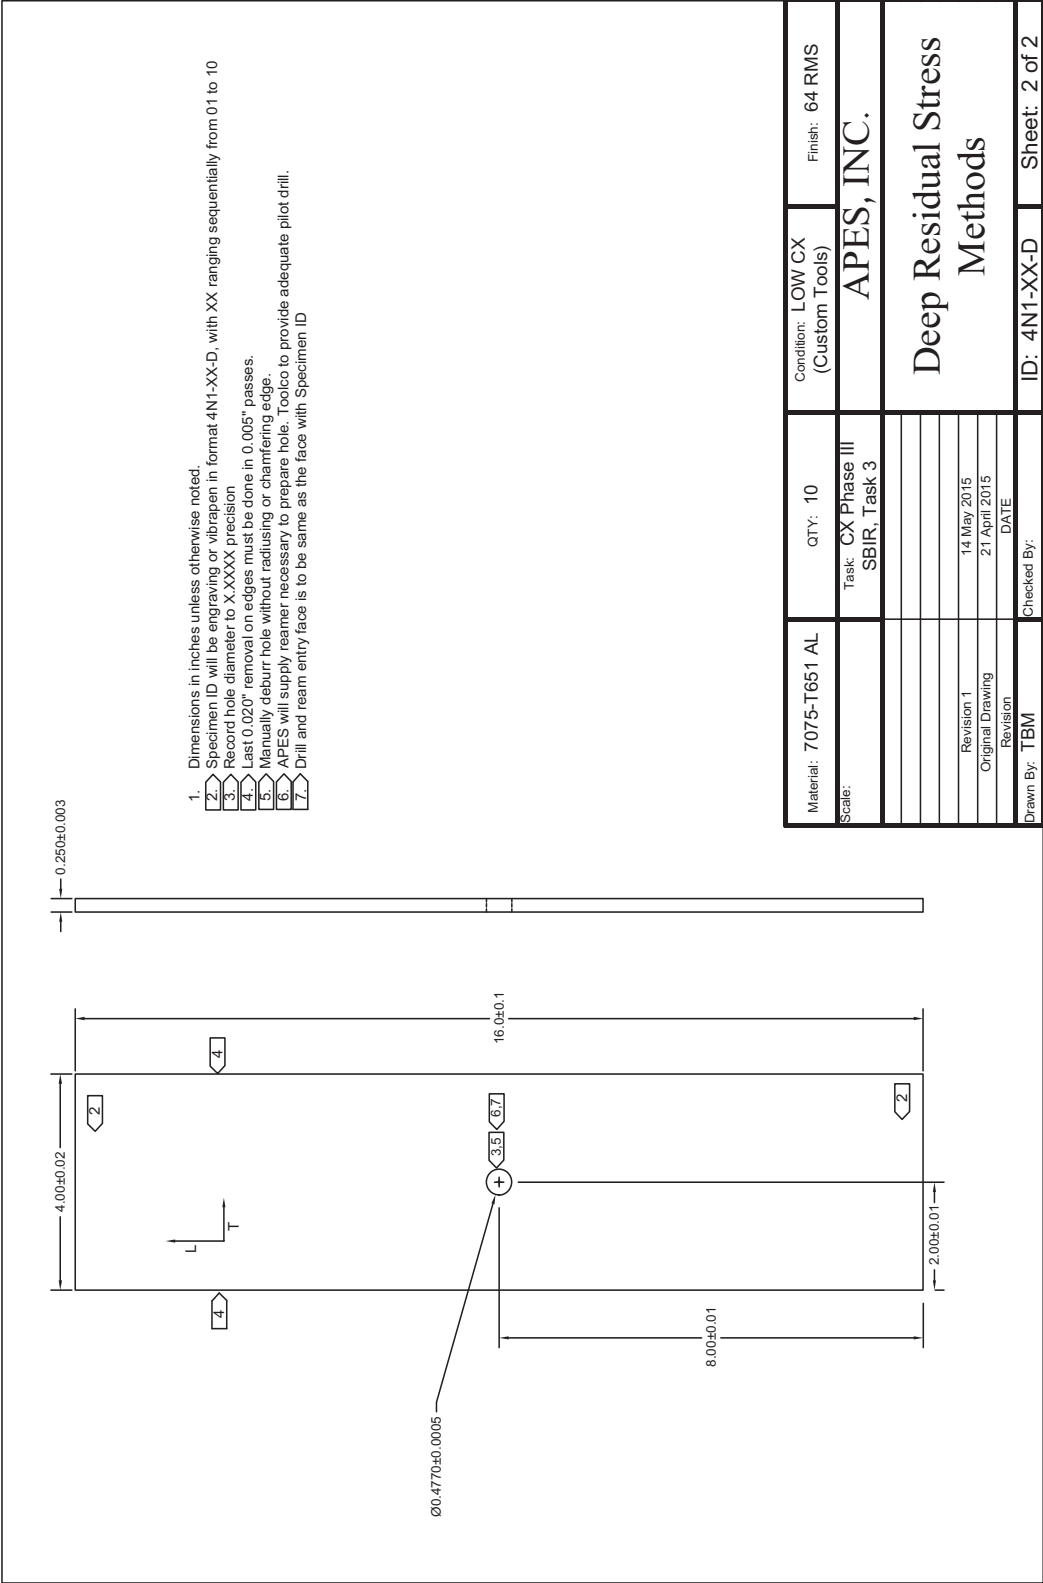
Manufacturing Drawing for Cx4N1-XX-D (7075-T651) Coupons Defining Initial Hole Size for Specific Applied Expansion Level.
